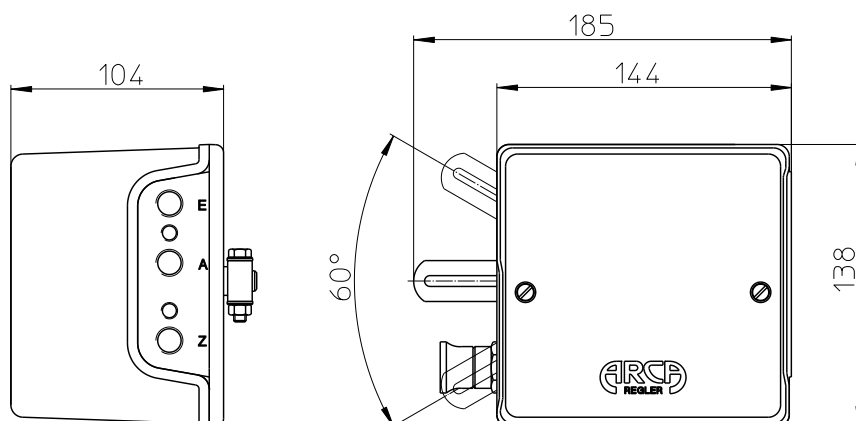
Dimensional drawing basic device type 824.P and 824.E
